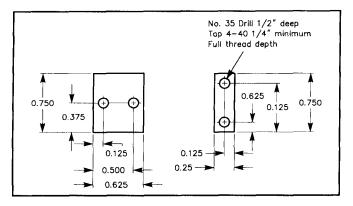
Mounting brackets for the insulators shown in Fig 12 are made from 1/4-in. aluminum or brass bar (aluminum is preferred).
